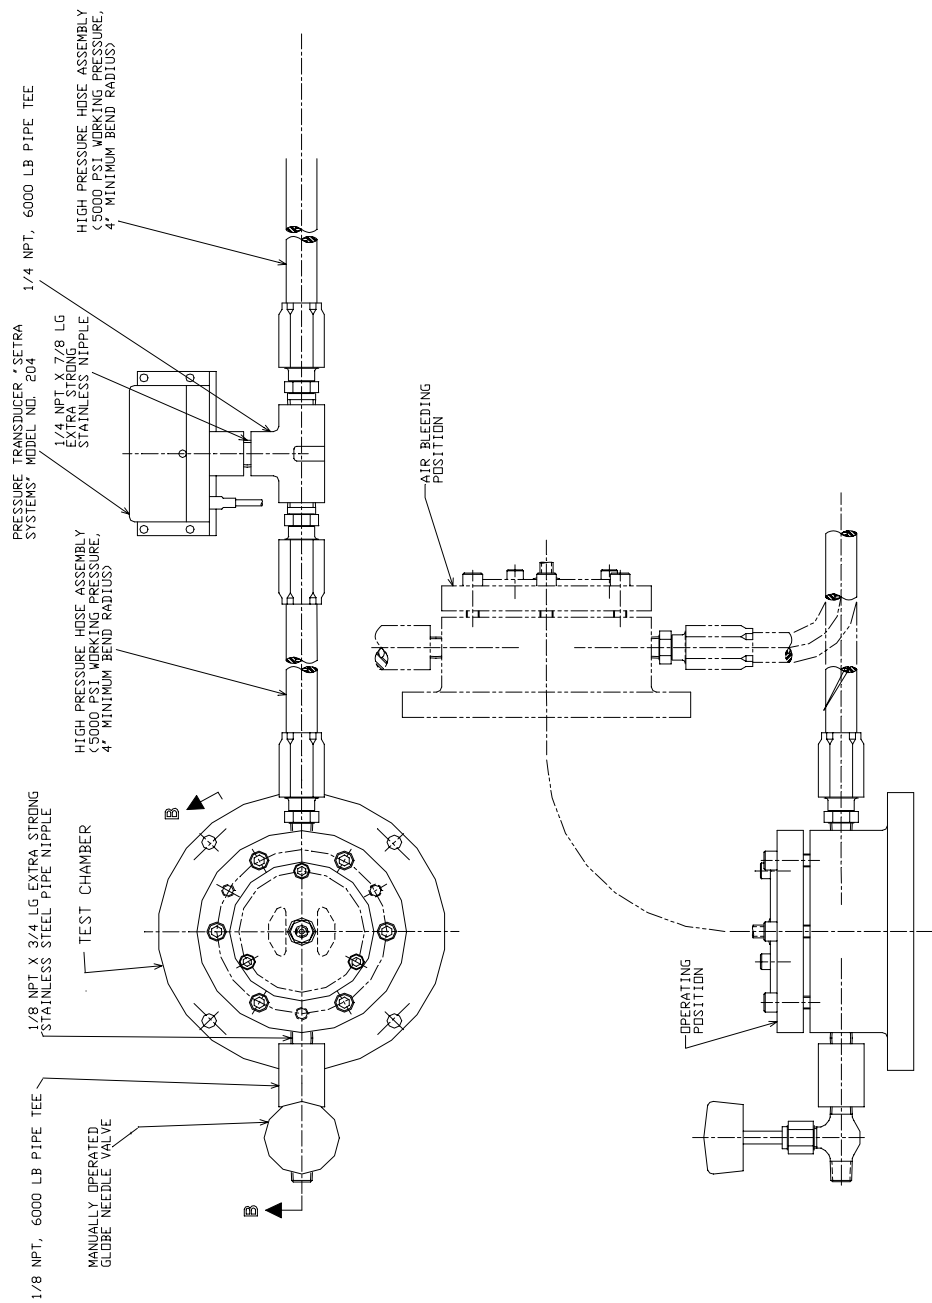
Assembly drawing for a biaxial test apparatus capable of applying a uniform pressure to a disk test specimen.
